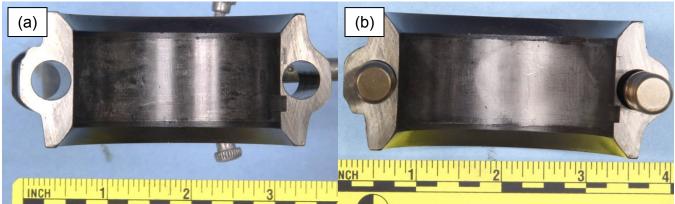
The bearing surfaces of the #6 (a) connecting rod and (b) the connecting rod cap.
